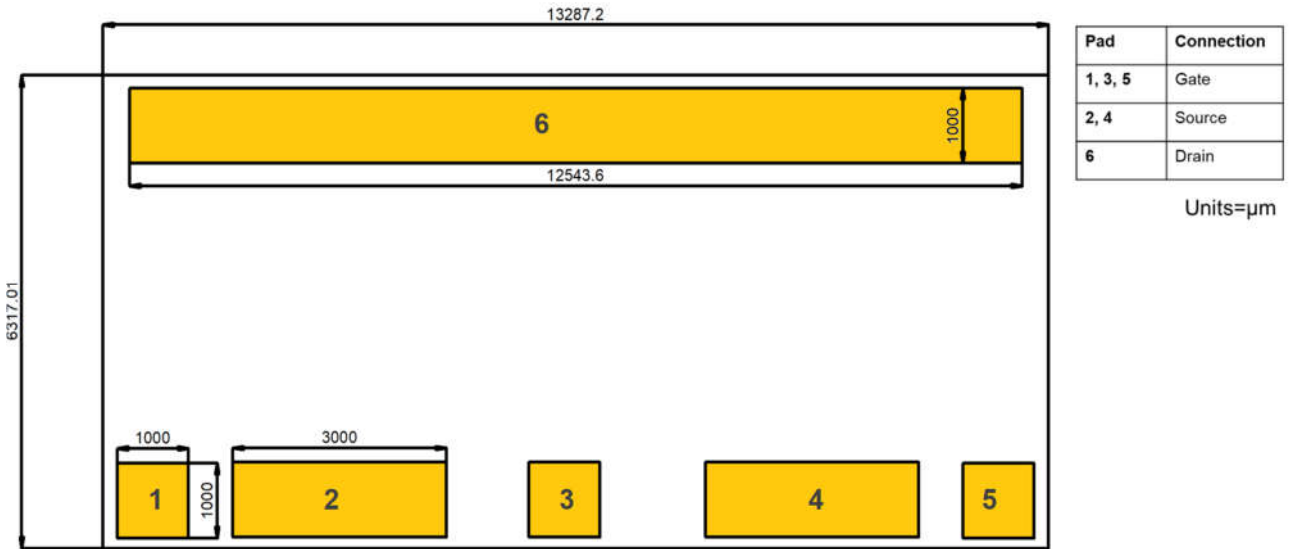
Die Bonding Pad Drawing-1 (Split Source)
